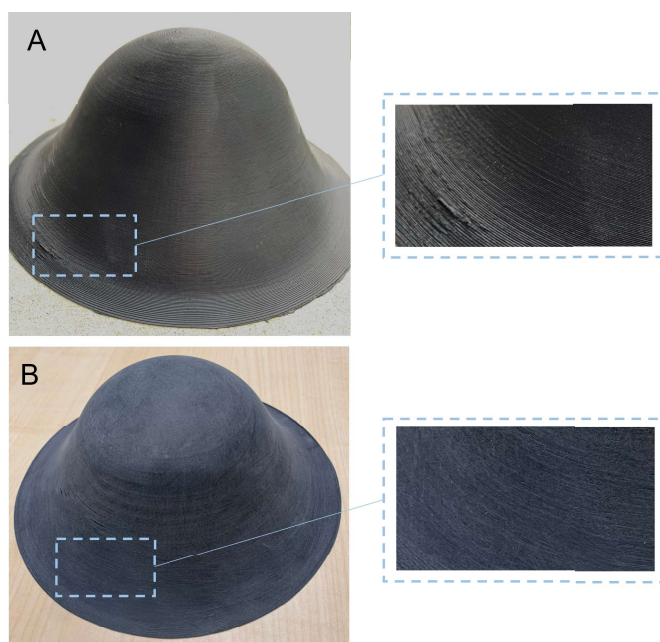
A: 3D printed ABS cup mould for vacuum shaping the inner PVC cup. The surface has a ribbed structure due to the set layer thickness. B: ABS cup mould after grinding with sand paper. The ribbed structure is diminished and the surface is smoother.
